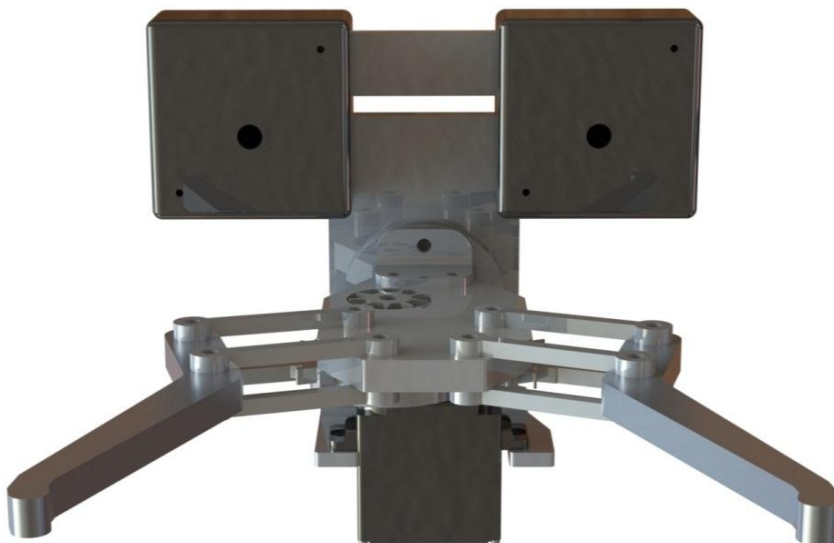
Gripper Assembly with Modified Fingers (Front View)
